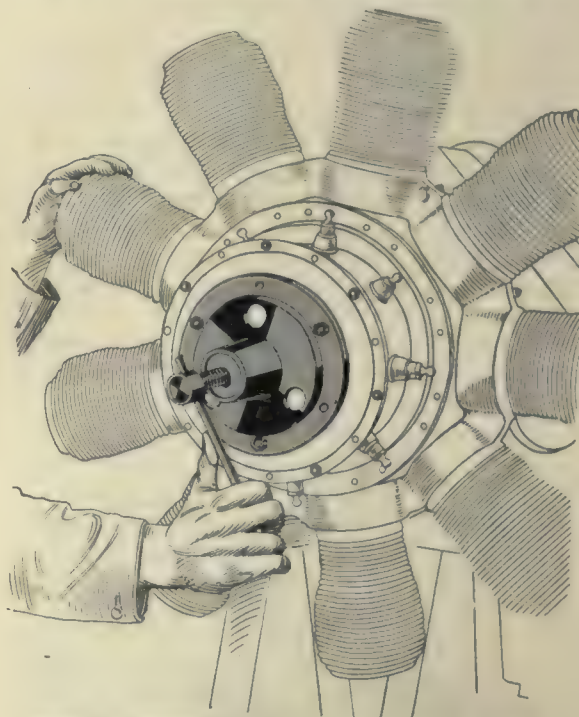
WITHDRAWING VALVE-GEAR CASE
